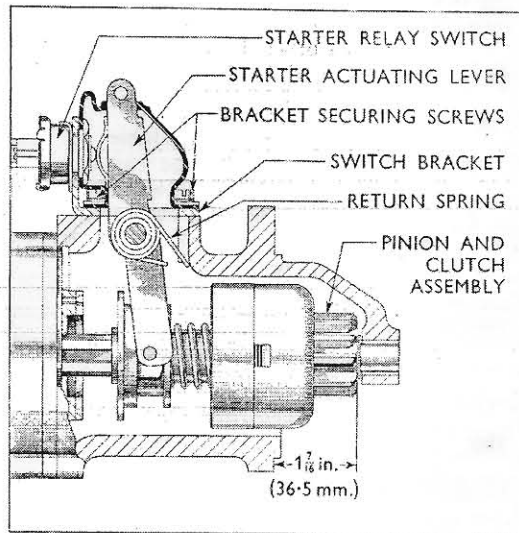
Diesel Starter Actuating Mechanism in the Operating Position
